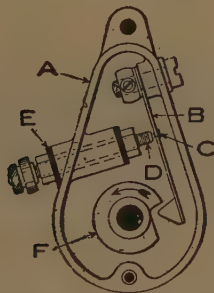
,985.—Contact maker and mechanical vibrator. The case, A, is usually attached to the gear box of the engine; B, is the vibrator blade; C, a platinum contact point; D, an insulated adjusting screw; E, a bushing with insulation; F, the operating cam. As this cam revolves the weight on the end of blade, B, drops into the recess on the cam causing the blade to vibrate and make a number of contacts with D, thus producing a series of sparks when in operation.
